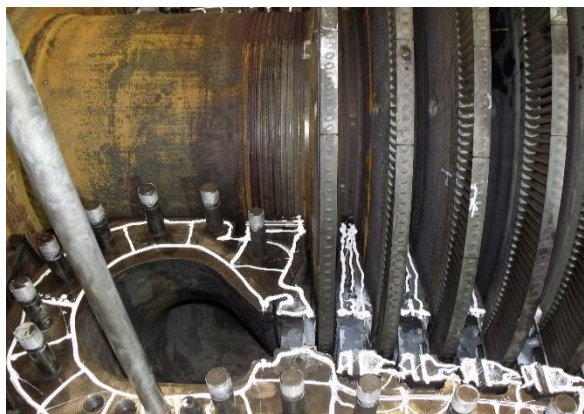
IP casing half-joint just before assembly showing sealing compound to stop leaks.
